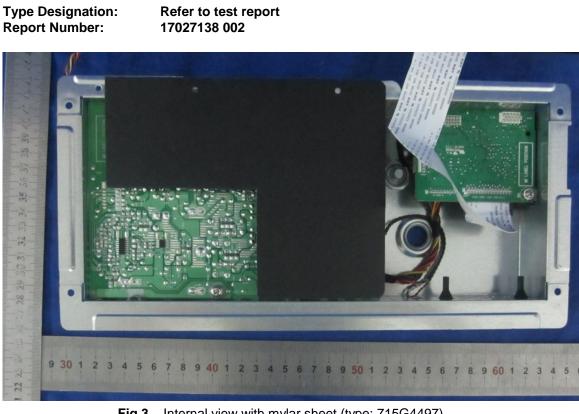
Internal view with mylar sheet (type: 715G4497)
